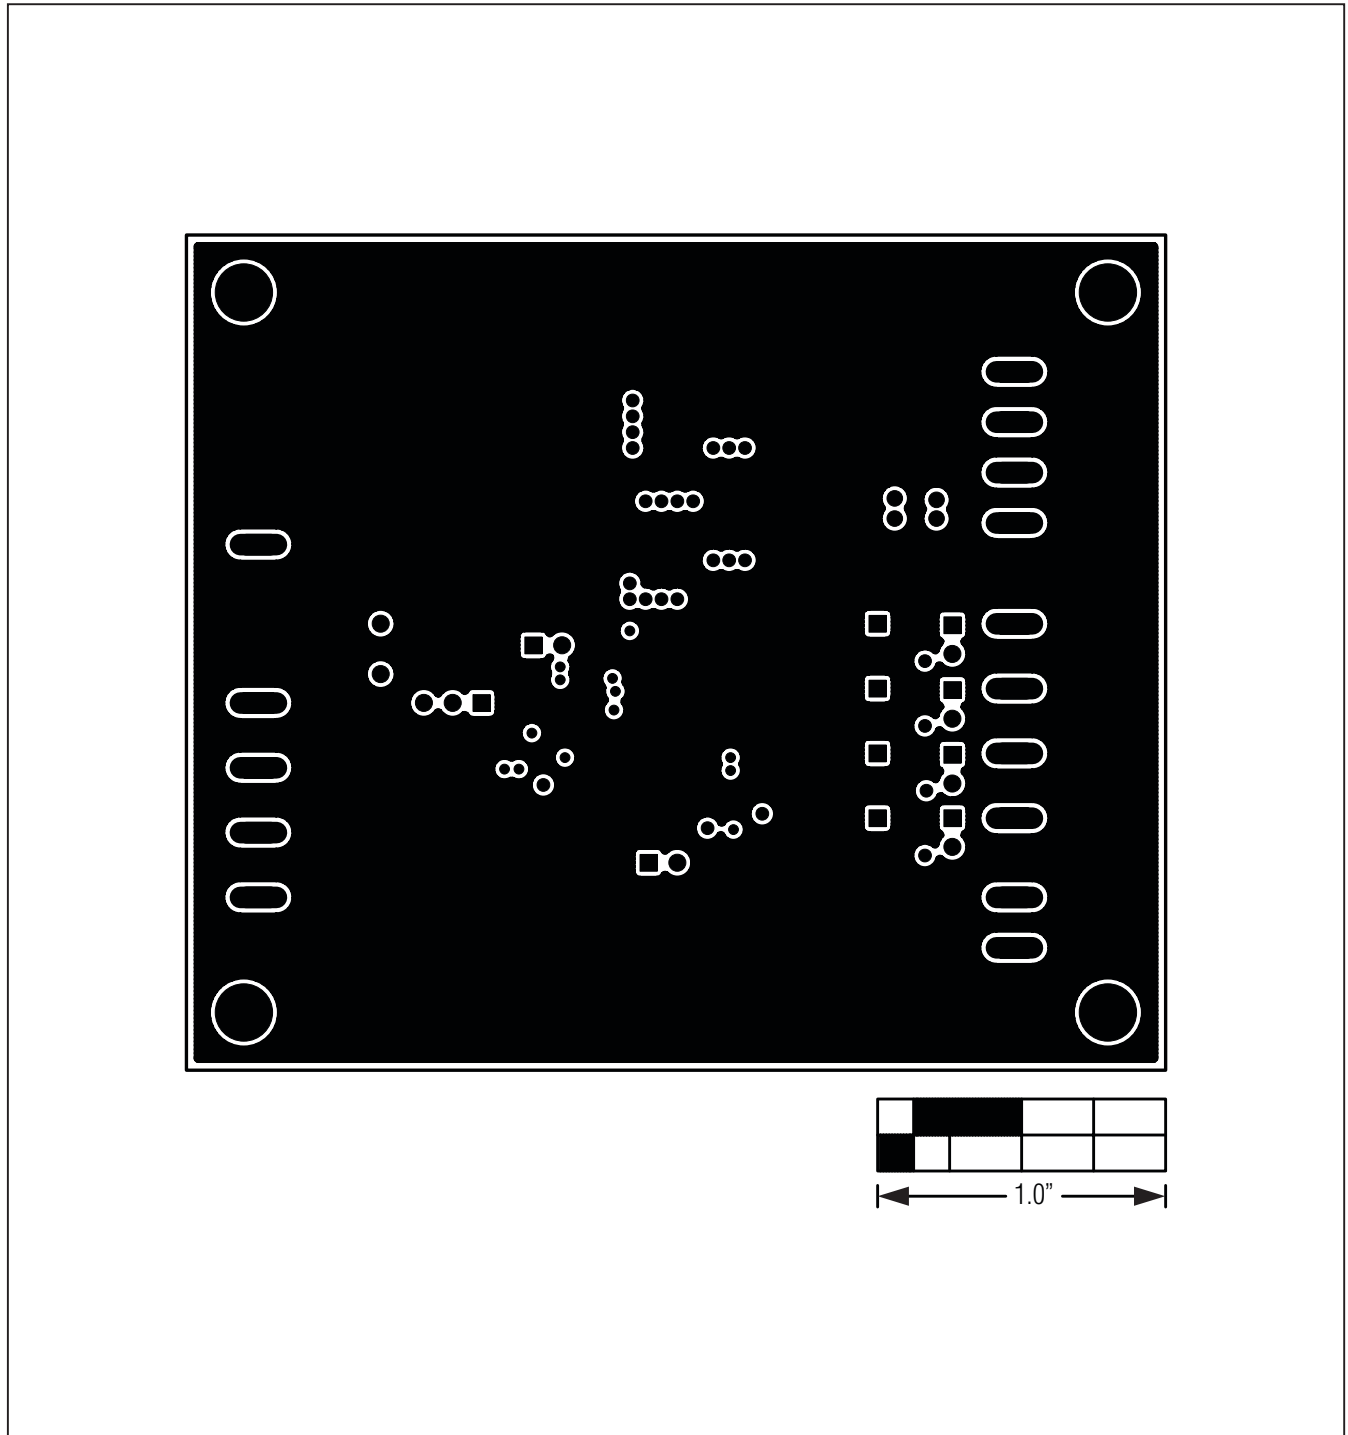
MAX16814 EV Kit PCB Layout—PGND Layer 3
